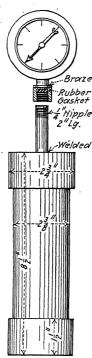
Vapor pressure apparatus with gage connection used by the Atlantic Refining Company.
